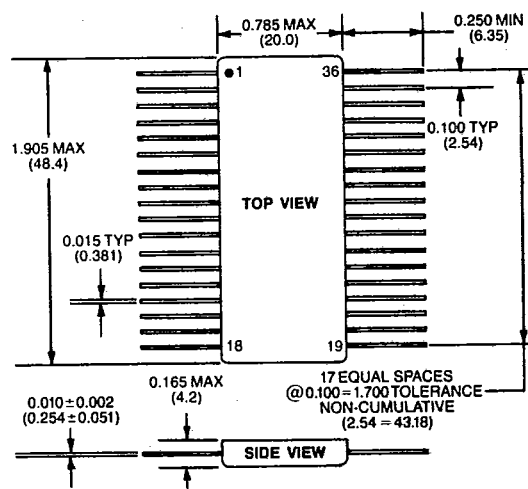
BUS-63126 II, BUS-63128 II, BUS-63136 II, AND BUS-63138 II MECHANICAL OUTLINE-36 PIN FLATPACK
